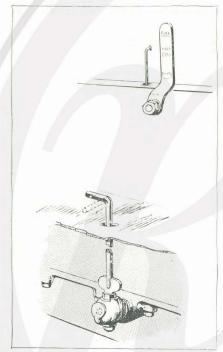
Oil Level Indicators on the 14 H.P. "Standard" Engine.
